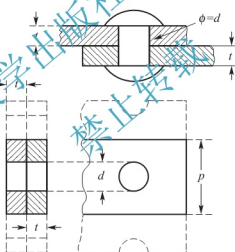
Principal dimensions of the simple riveted lap joint
